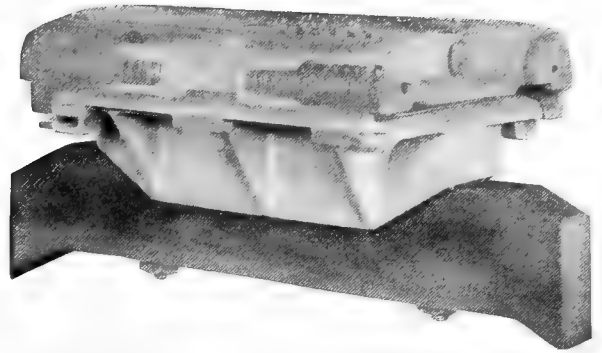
Creco Covered Roller Side Bearing Applied to Bearing Bridge of Six-Wheel Truck.
